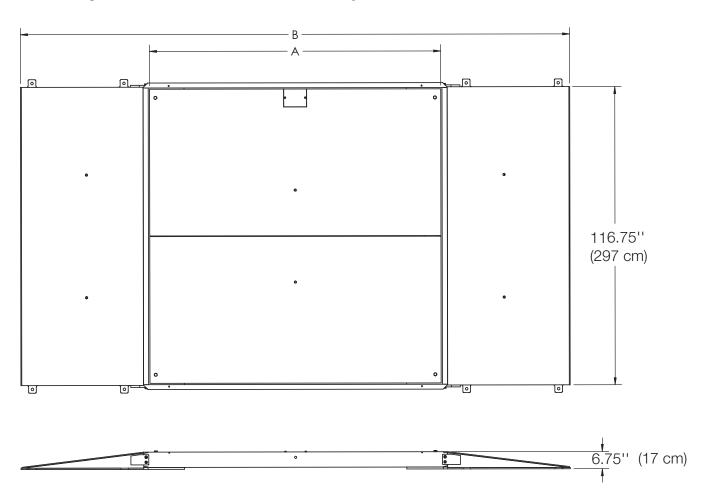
RoughDeck AX-1 Scale and Frame with Ramps Dimensions Drawing
